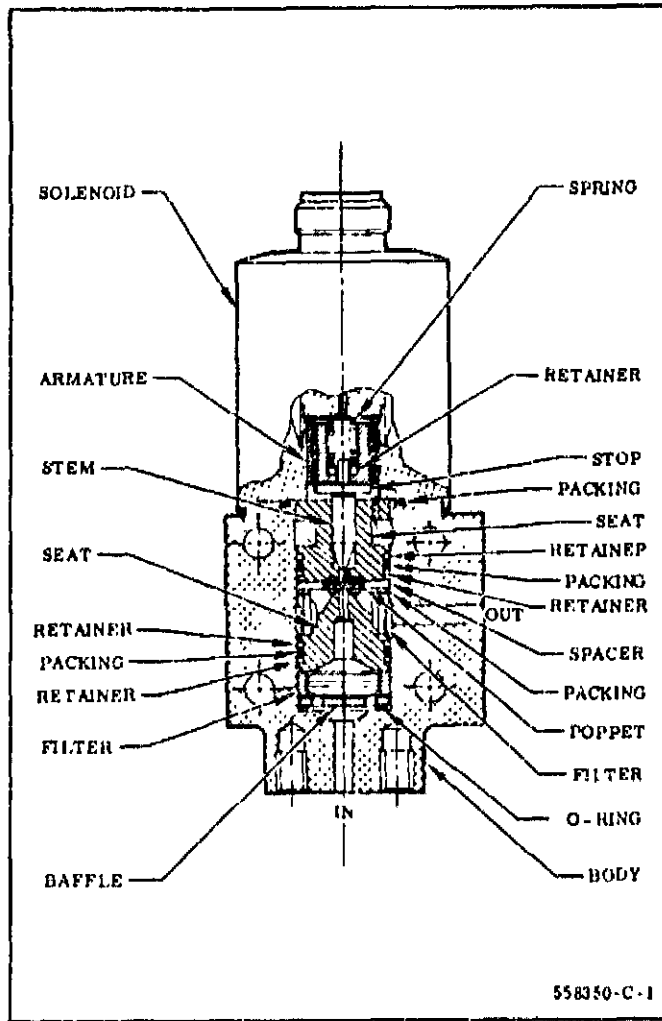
Redundant Shutdown Valve--Cutaway View
